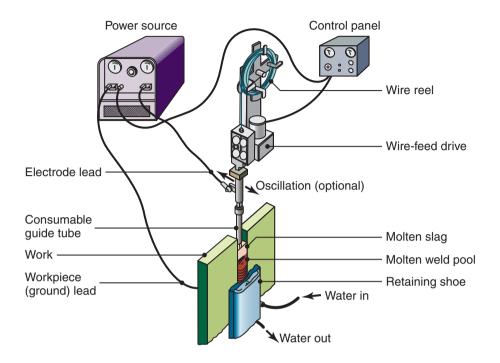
Equipment used for electroslag-welding operations.
